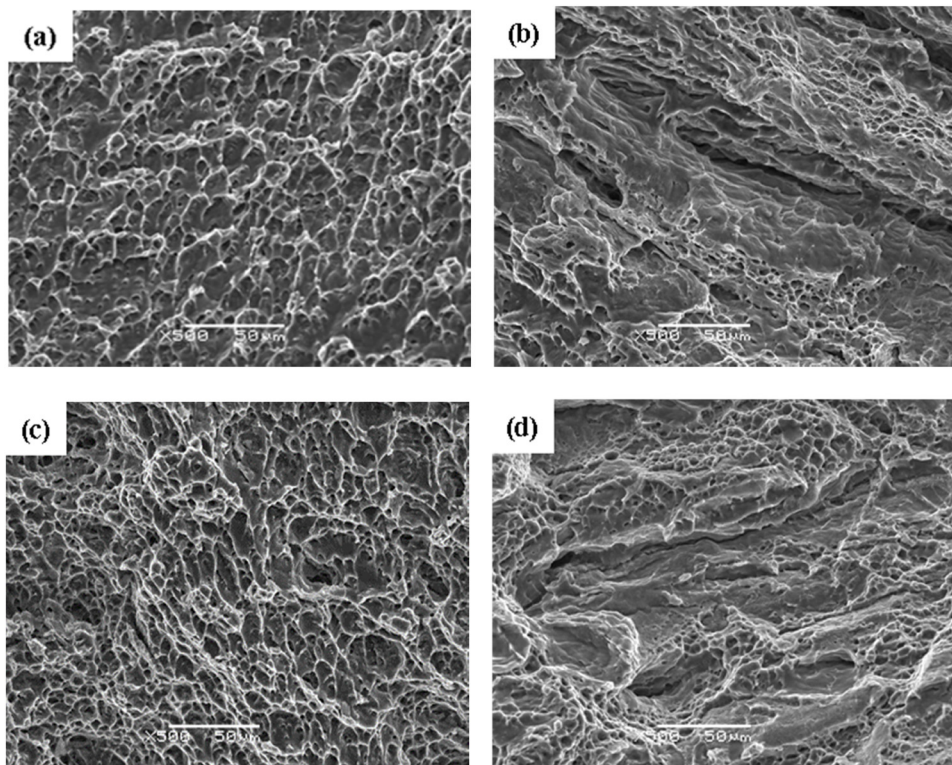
Scanning images of tensile fractures of joints under different conditions: (a) AW joint, (b) HT1 joint, (c) HT2 joint, and (d) HT3 joint.
